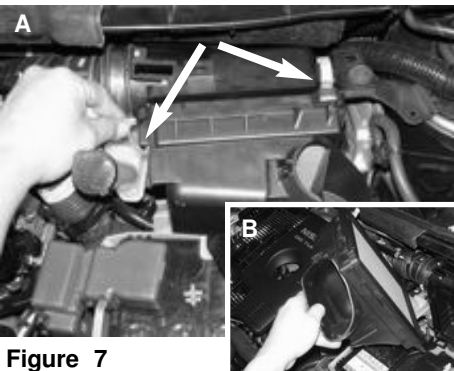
Un-clip the two tabs on the top of the air box housing. Figure B: Remove the front of the air box housing
